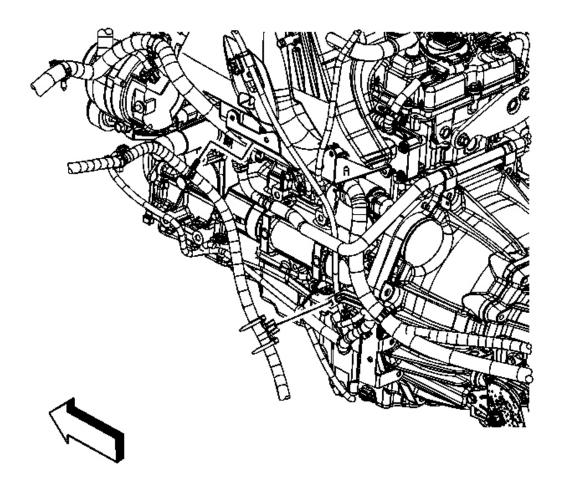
Identifying Right Engine Mount-To-Frame Bracket Bolt Courtesy of GENERAL MOTORS CORP.
